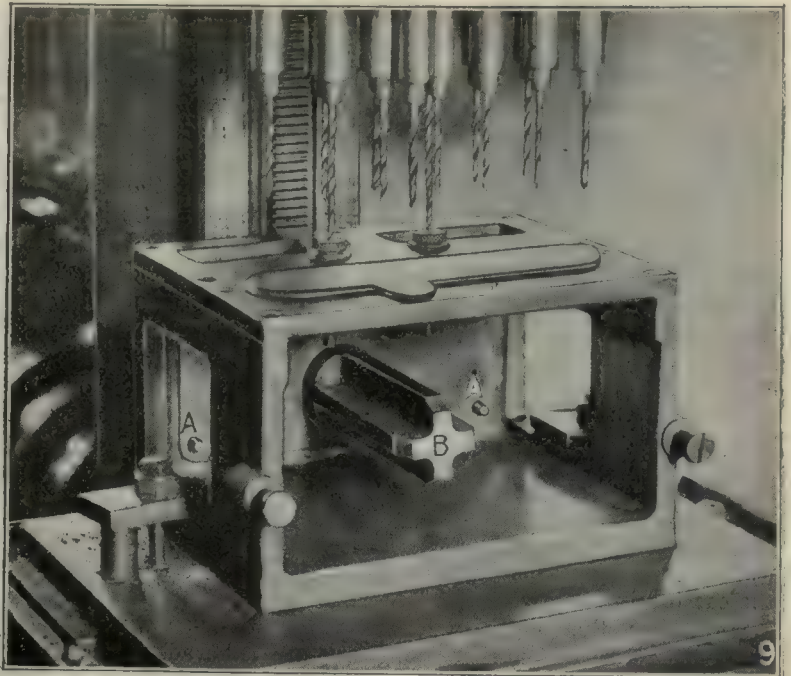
FIXTURE FOR DRILLING EXHAUST BOLT HOLES
